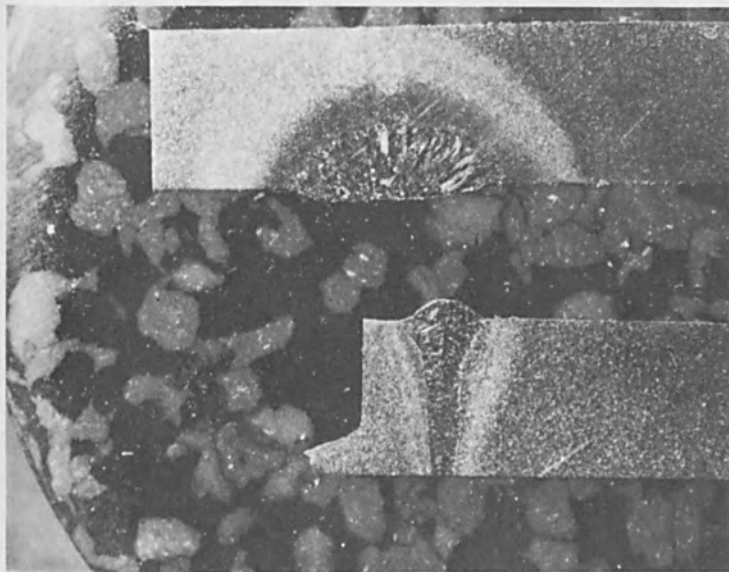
Upper specimen represents typical continuous bead GTA weld repair. Lower specimen is a representative continuous bead electron beam reweld.
